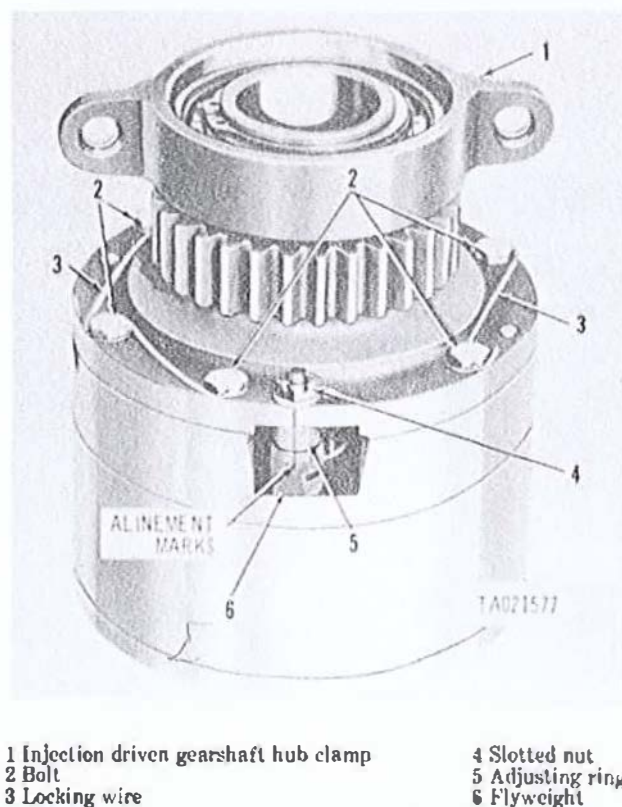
Removing advance flyweight adjusting ring and injection pump drive gearshaft.
